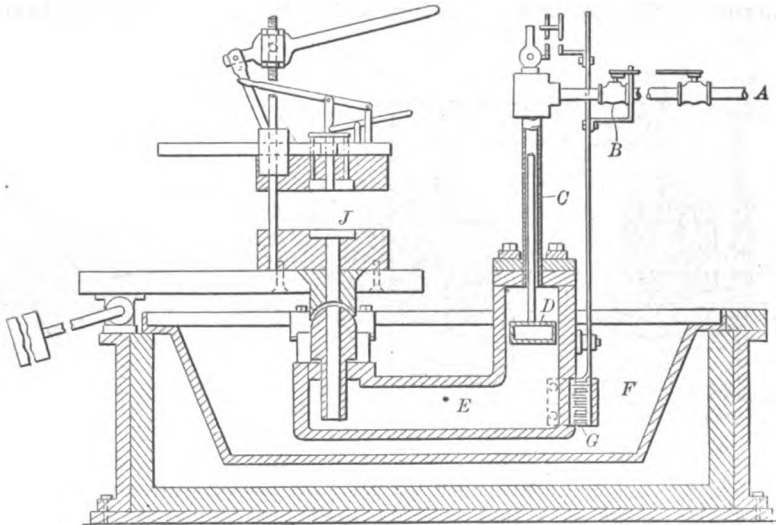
MACHINE USING AIR PRESSURE TO FILL MOLD
